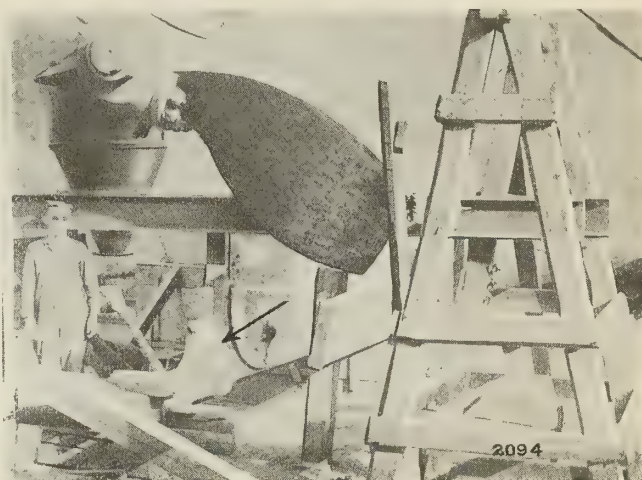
S. S. *Sierra* of Inter-Ocean Steamship Company. Section of Stern Shoe, $11\frac{3}{8}$ by 16 Inches, Welded September, 1917
